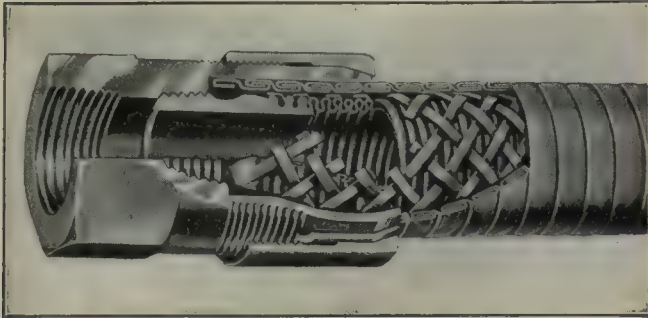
SECTION SHOWING THE TUBING, TERMINAL AND STYLES OF ARMORING
